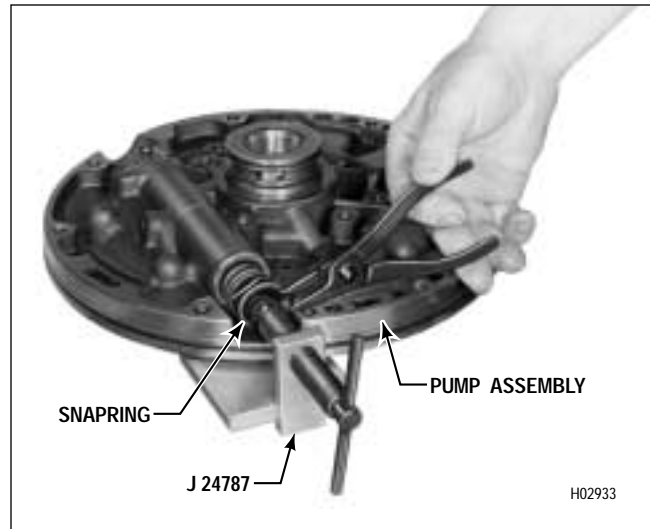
Removing (or Installing) Main-Pressure Regulator Valve
